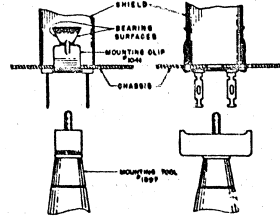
K-TRAN mounting clip and mounting tool.
